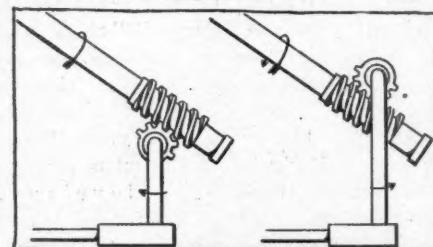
HOW ACTION OF STEERING GEAR MAY BE REVERSED BY LINKAGE
